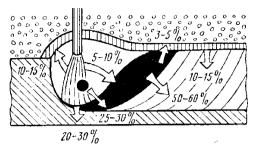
Scheme of heat input to the coating under the flux Welding materials used in welding under flux are welding wire
